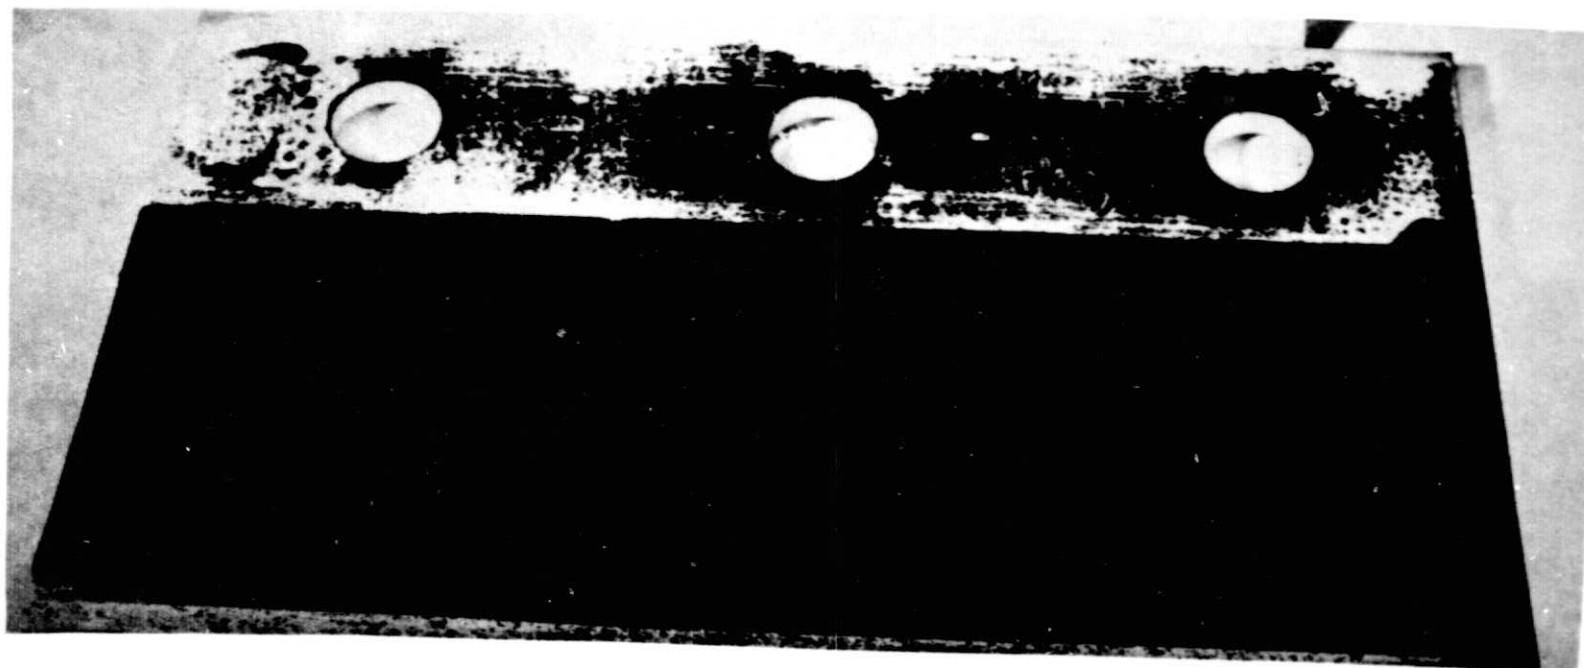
Post-test compressive specimen, 1/4-inch MSA-1, run 36, panel 1.
